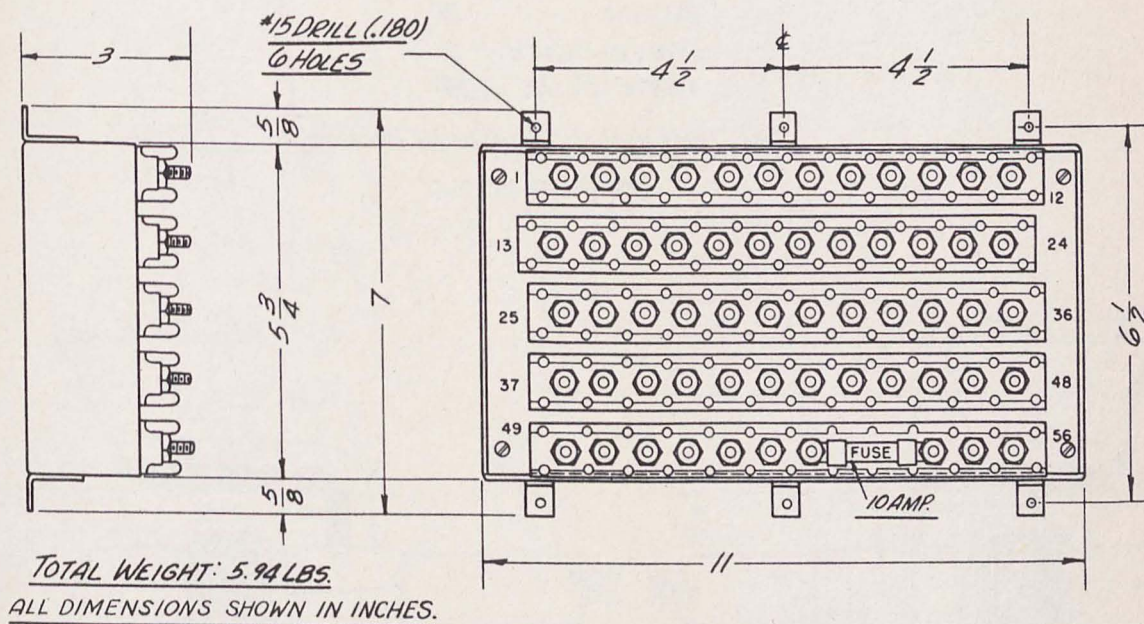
RELAY BK-23-A, OUTLINE DRAWING
